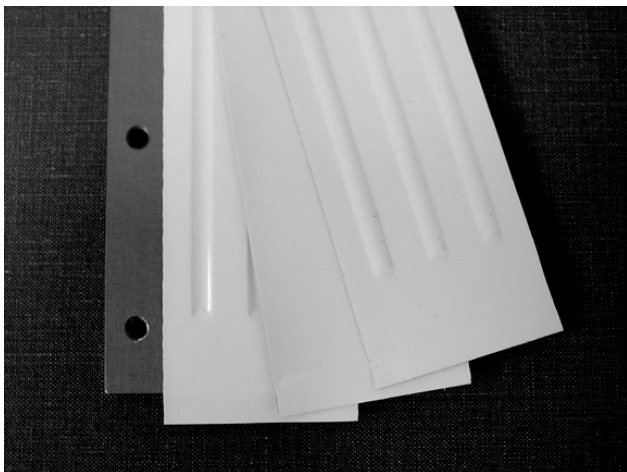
Examples of formed and flat tape segments illustrating how they are assembled to form the ceramic dielectric components.
